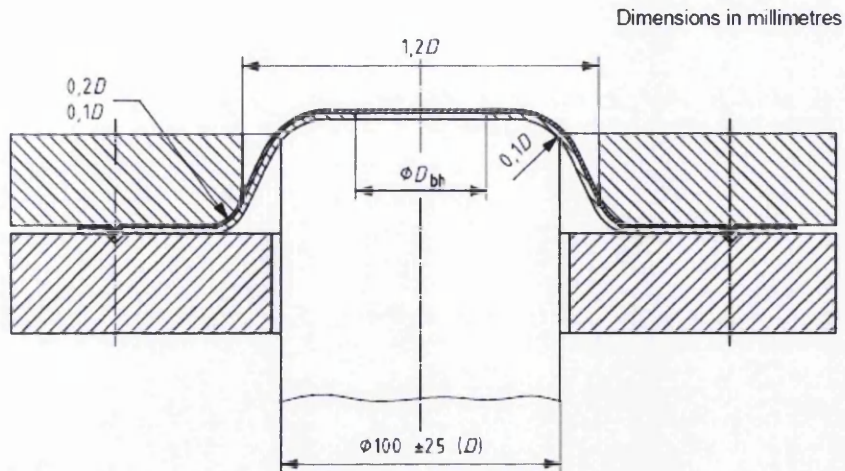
Illustration of the cross section of the tool used for the Marciniak testing.
